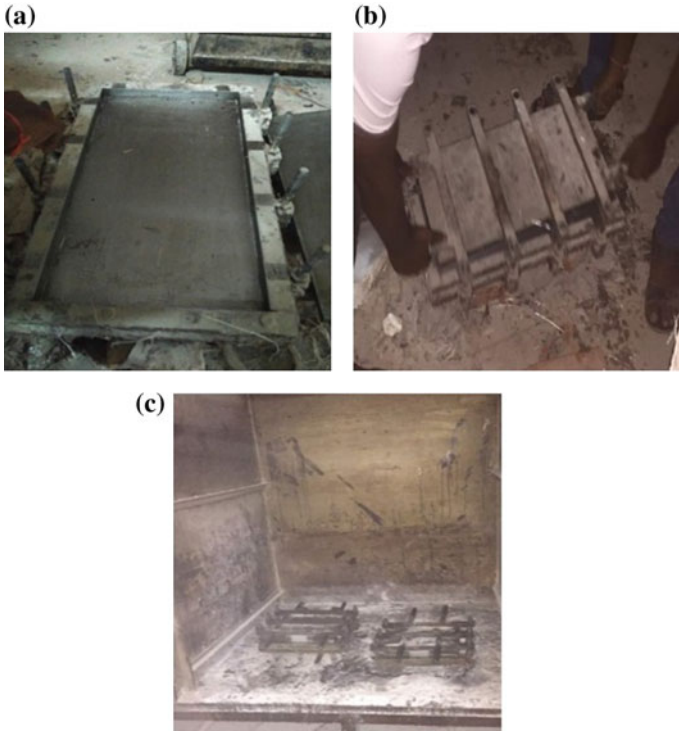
Fabrication process of laminates a lower mold b molding process c curing oven
